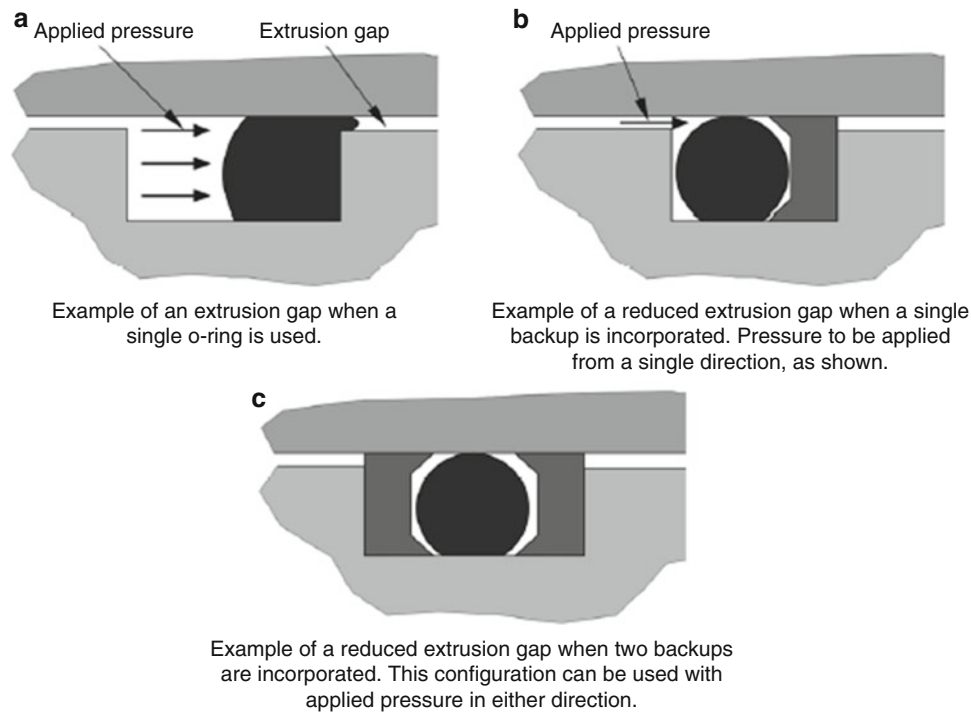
Examples of O-ring seals with and without backup rings [3]
